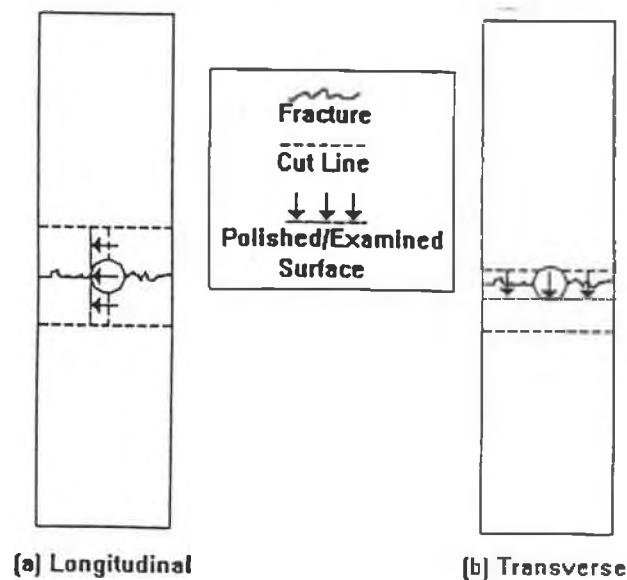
Longitudinal and transverse cross-sections of tested unnotched, open and filled hole tension and compression specimens.
